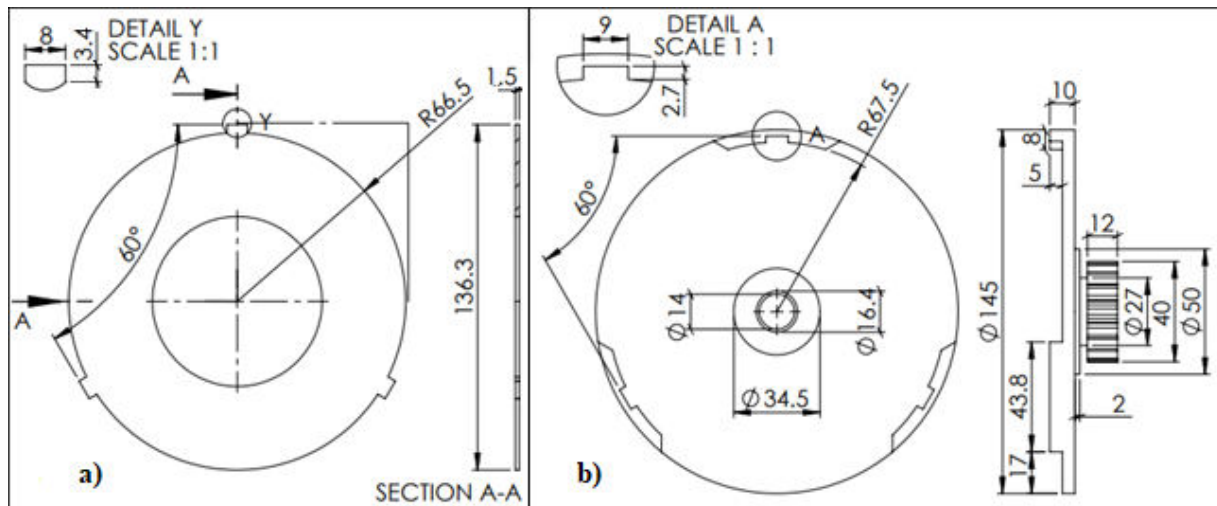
Right half-clutch: a) driven disc of the friction clutch;
